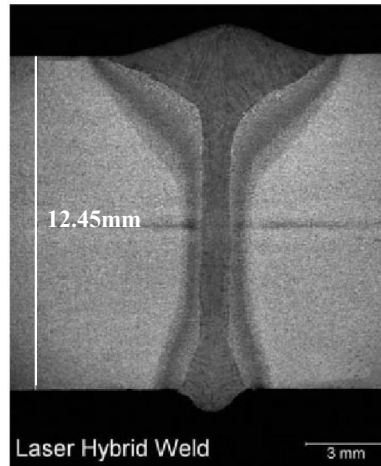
Cross section of one pass hybrid laser arc welding on a carbon steel square butt joint [175]
